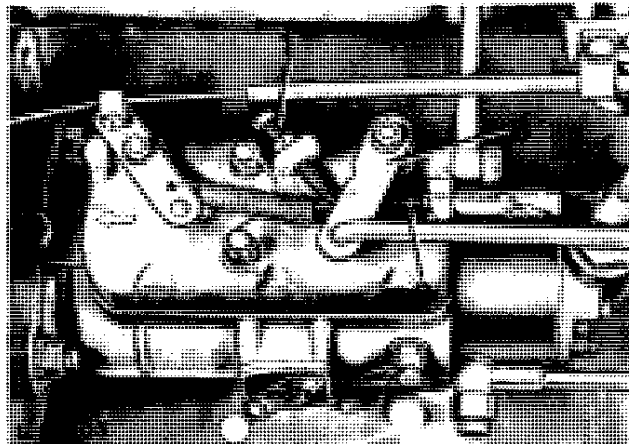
ROTO DIESEL Injection Pump, Installed
